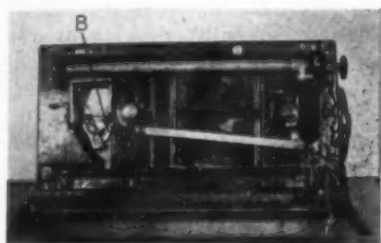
Lower side of the bed-plate of a short-lever shuttle-type machine. B is the short lever.
